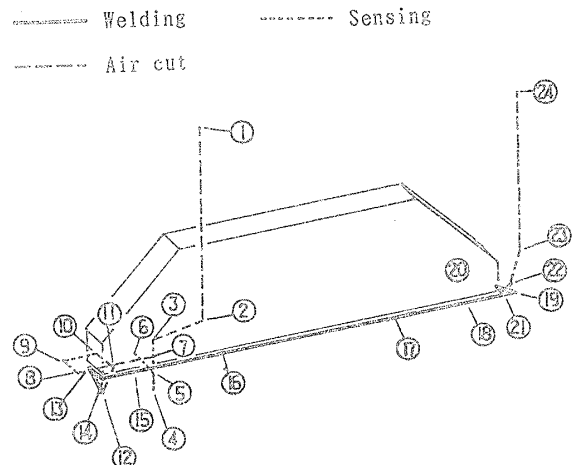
Breakdown of movements throughout the fillet welding task
